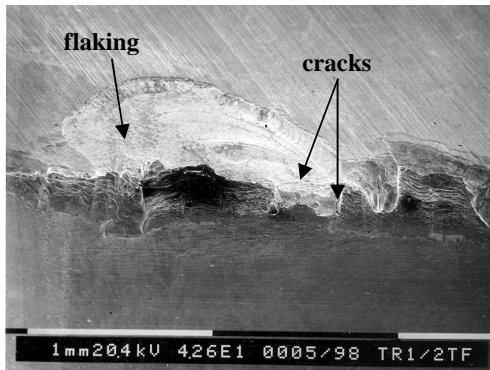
Severe flaking and thermal cracks on Tool A after 3.5 minutes of face milling Ti-6246 at 100 m/min
